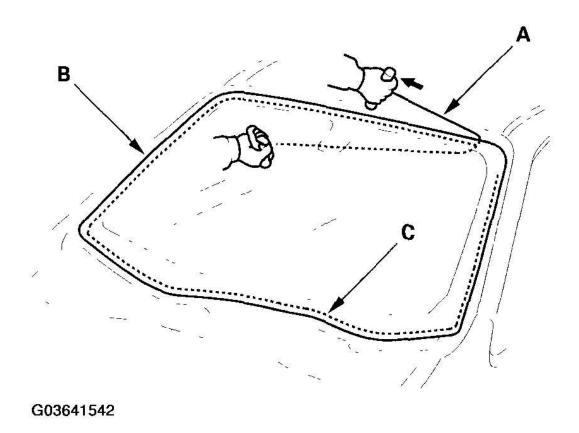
Cutting Positions Using Piano Wire (1 Of 2) Courtesy of AMERICAN HONDA MOTOR CO., INC.
